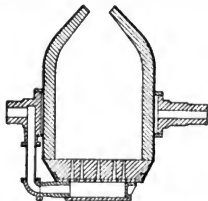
CROSS-SECTION OF BESSEMER STEEL CONVERTER.
